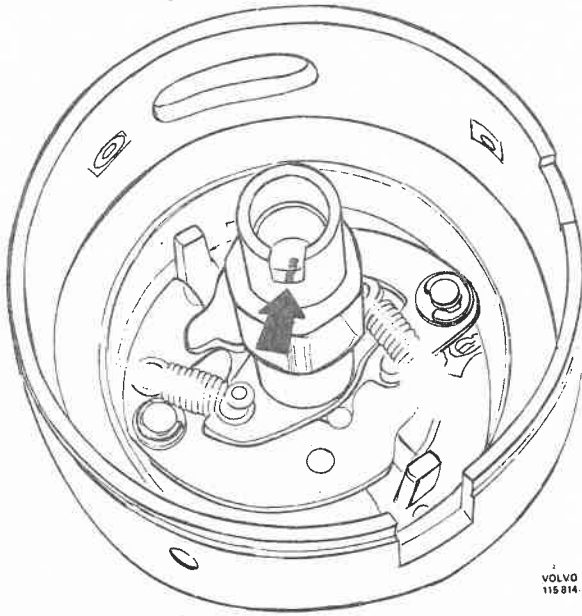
Line-up marking the breaker cam and distributor shaft
